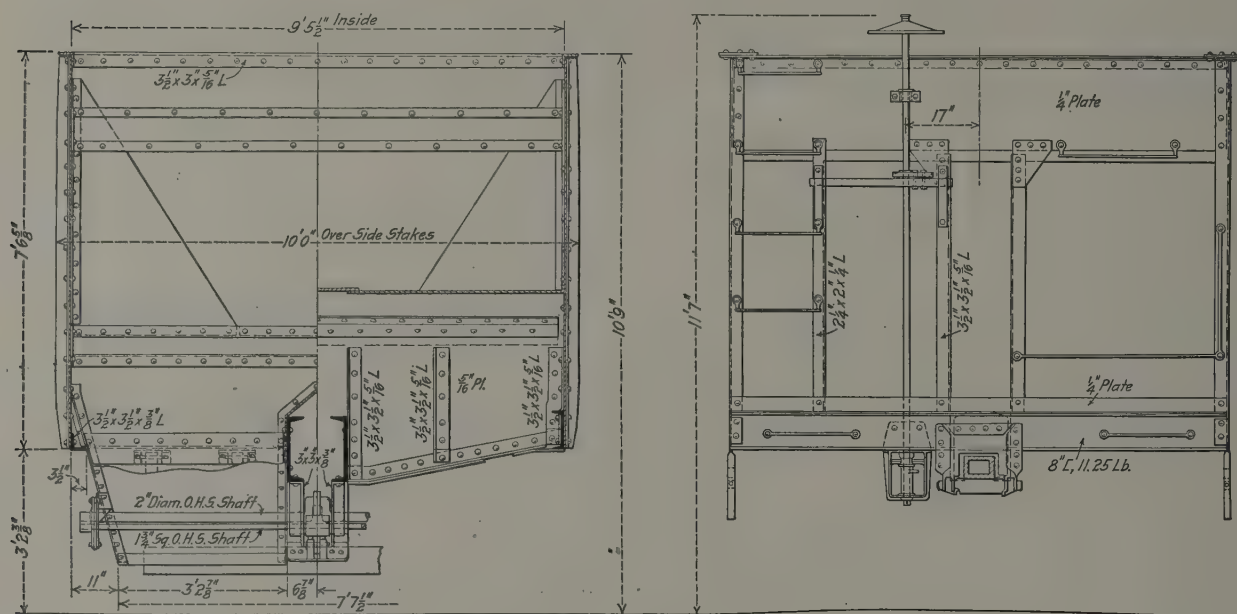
Cross Sections and End Elevation of the Hillman Hopper Car Shown in Fig. 76.
